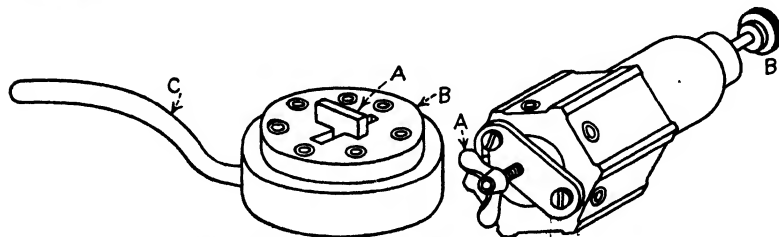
Pan type of jig. Clamp *A* holds bushing plate *B*. Handle *C* is for convenience in moving, and for holding jig while fastening the work.
